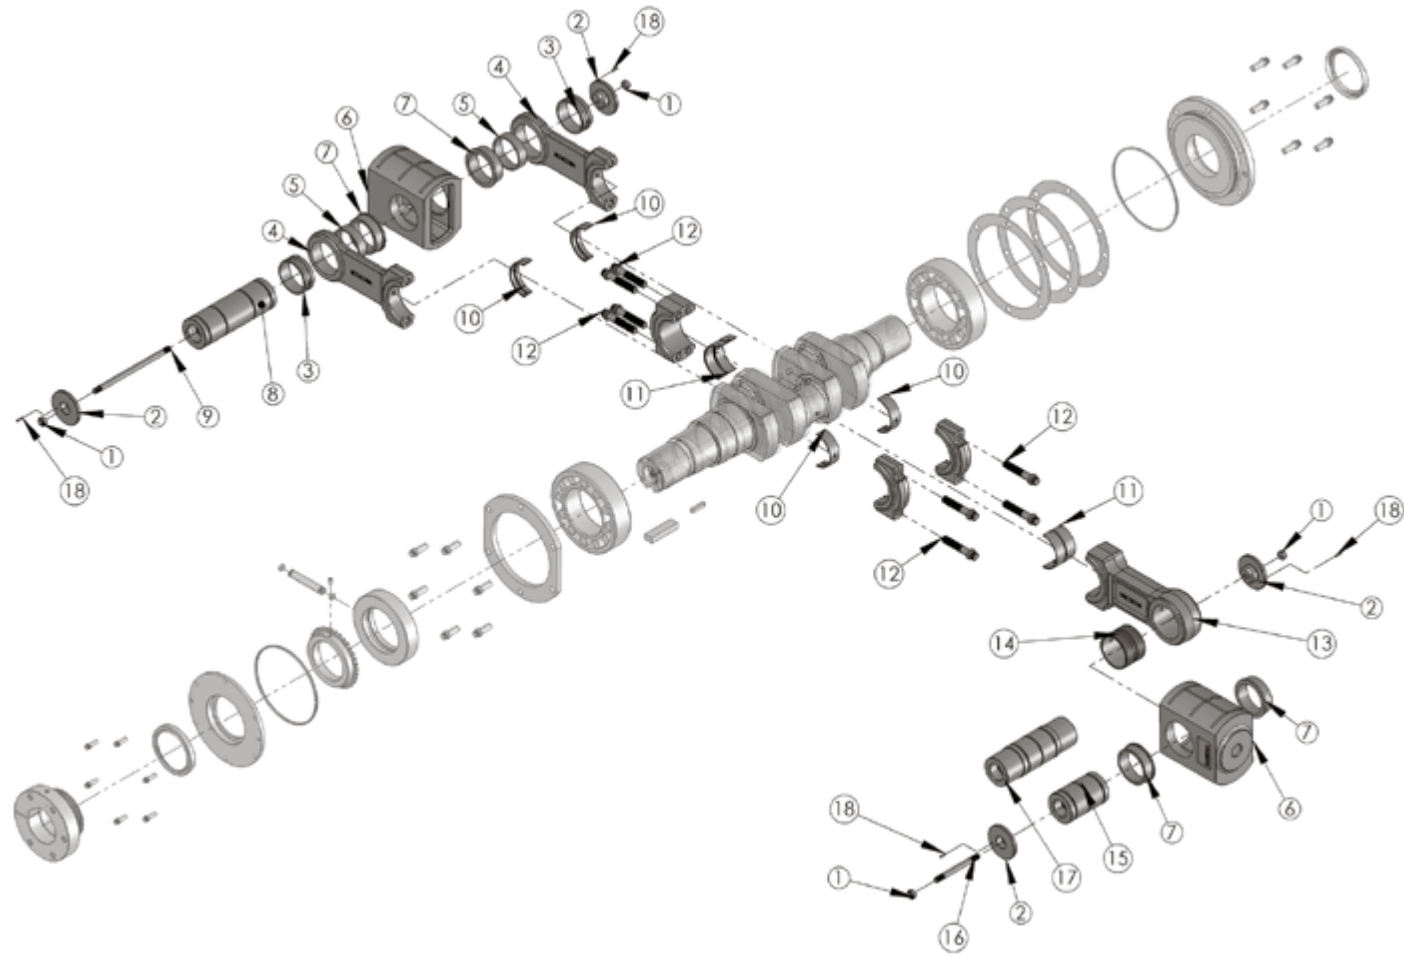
Crosshead and Connecting Rod Exploded View
